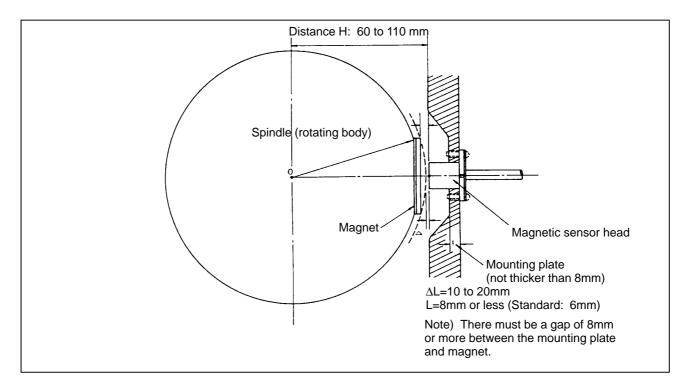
(b) Example of Mounting a Magnetic Sensor (2) (Mounting a Magnetic Sensor on a Cylinder)
